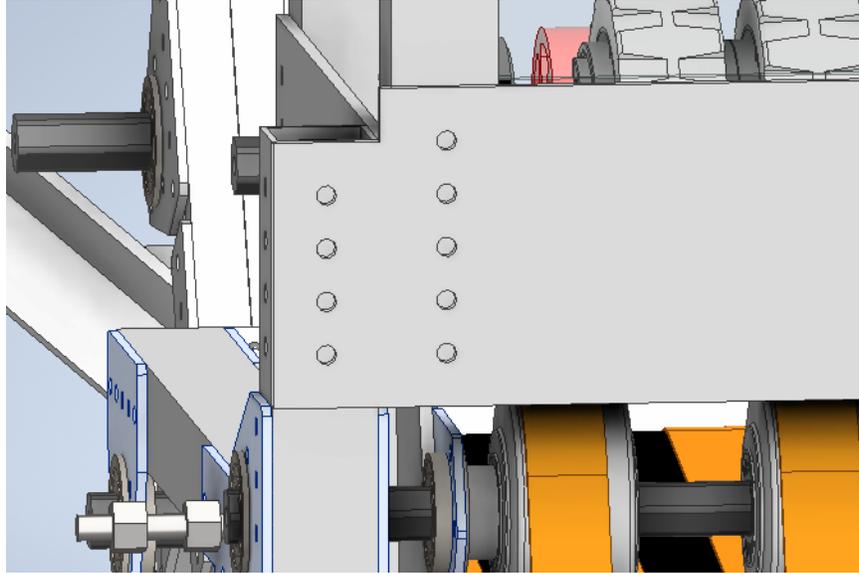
Match drilled holes on the 2017 robot. The holes are only modelled in the flat piece in front, not in the tubes.
